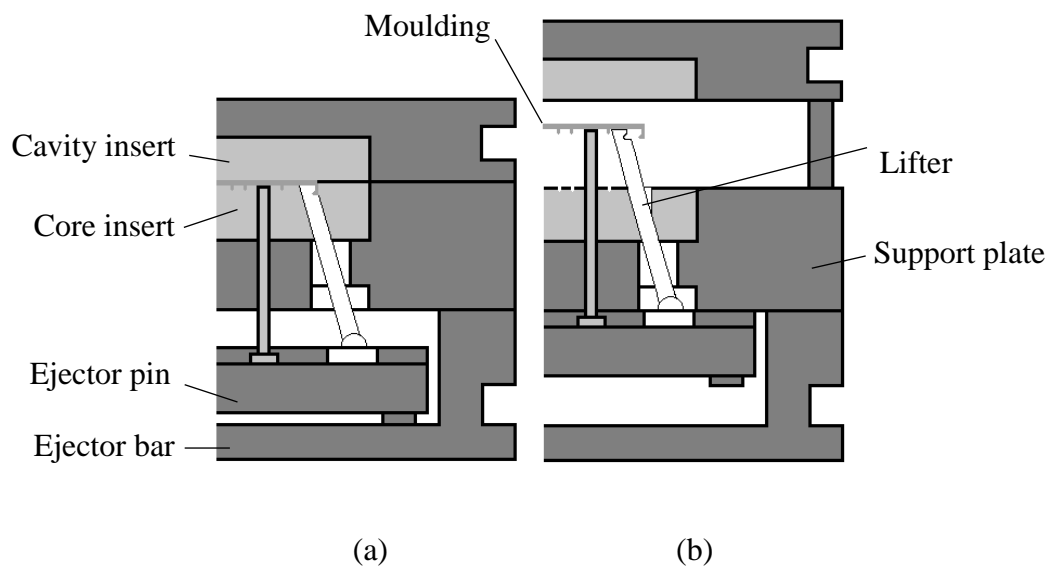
Lifter (a) closed mould (b) opened mould (Menges et al. 2001)
